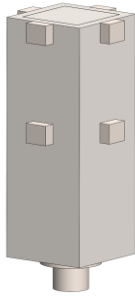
Isometric view of mock Z-axis. The spindle is inserted in the frame and extends from the lower end.
